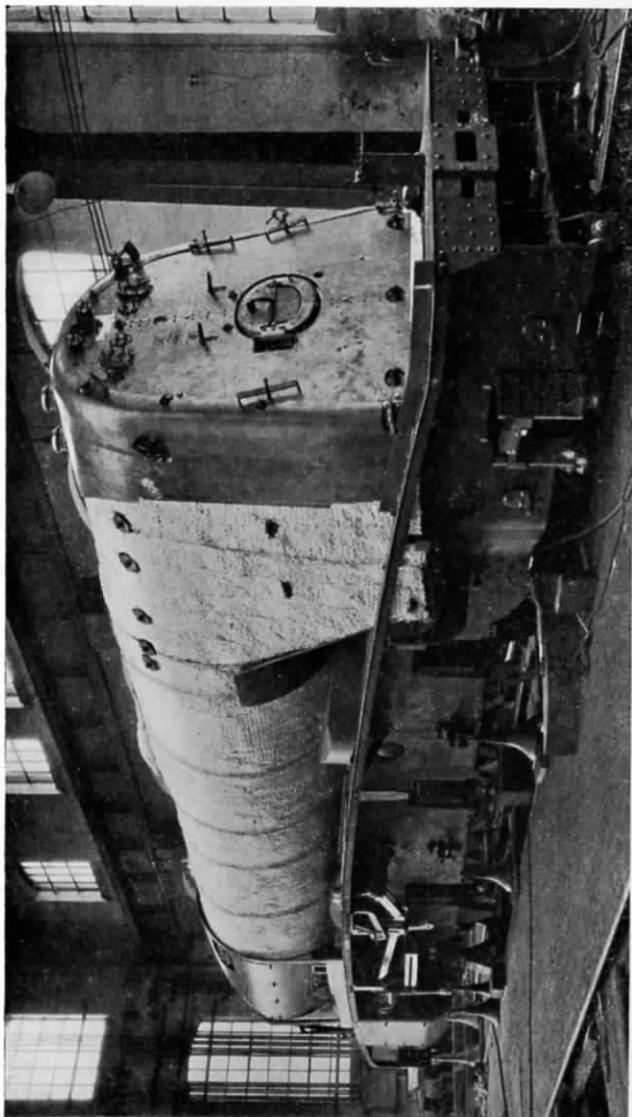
LOCOMOTIVE BOILER LAGGED WITH "ALFOL" INSULATING MATERIAL.
